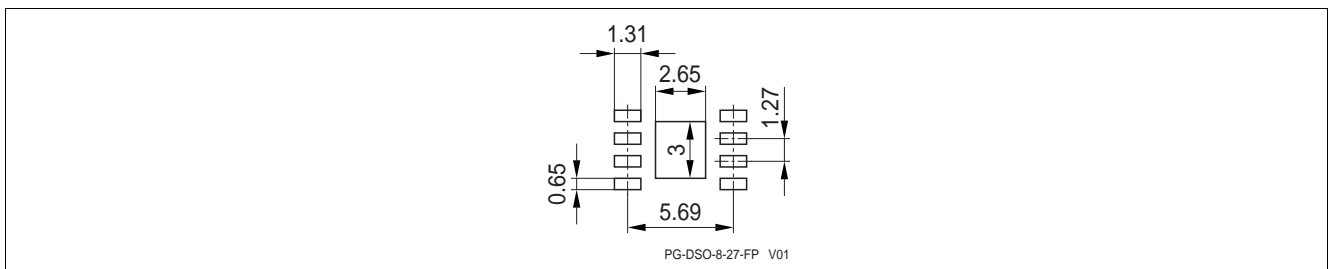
Recommended PCB Footprint for Reflow Soldering (dimensions in mm)
